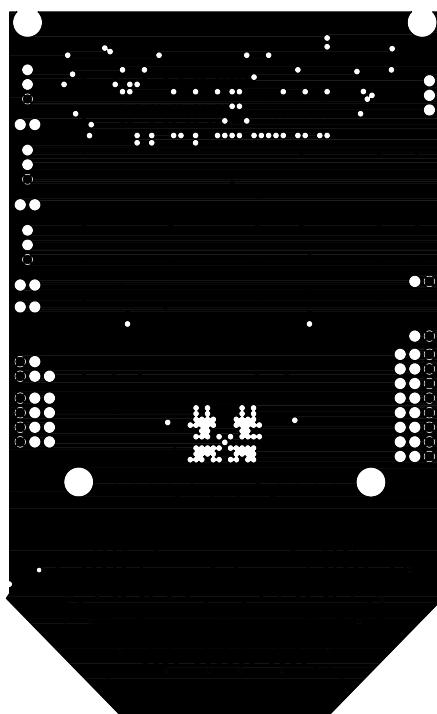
Si5110-EVB Layer 4—GND2 Plane (Daughter Card)
